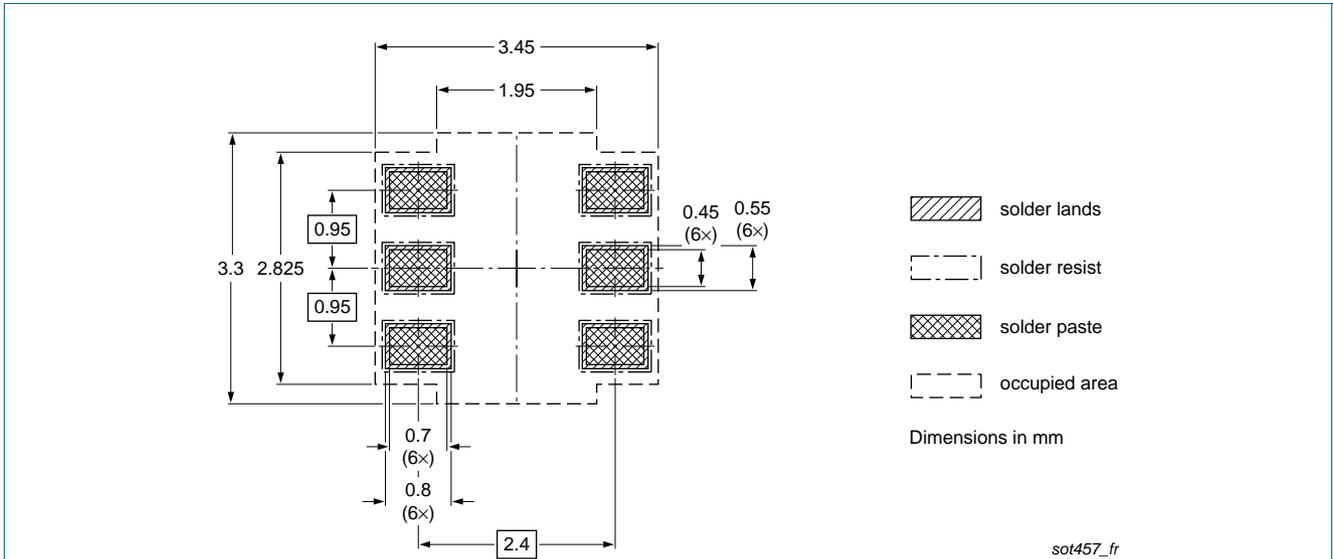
Reflow soldering footprint for SOT457 (TSOP6)
